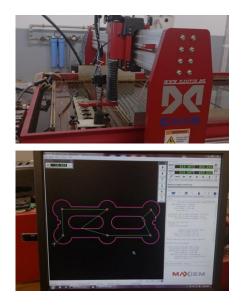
, 6. Cutting Water Jet Machine (ICDT, Laboratory –L3).
